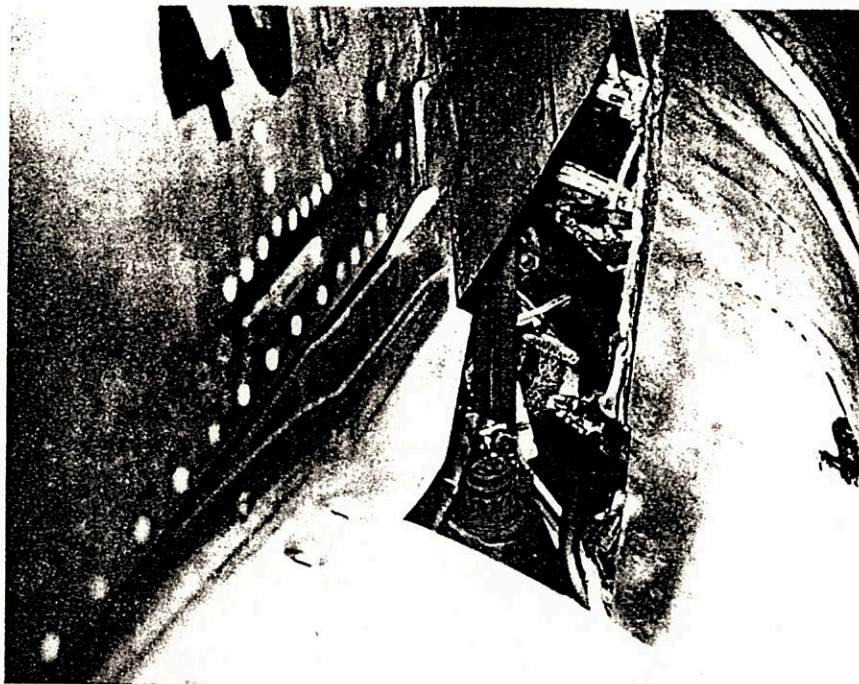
FAILURE OF COWL DOOR HINGE AND ATTACHMENT POINTS
